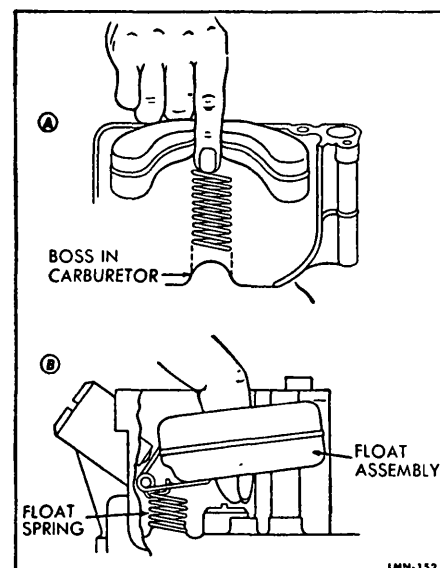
B Assembling float spring in 1949-51 Lincoln and Mercury carburetor
